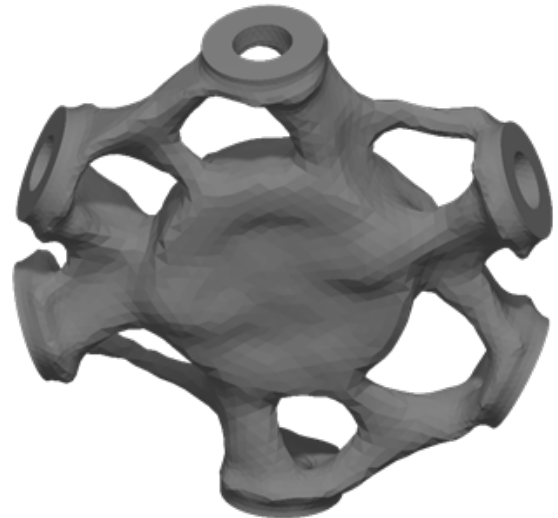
Additional elements added before shrink-wrapping to improve structural behaviour and fabrication
